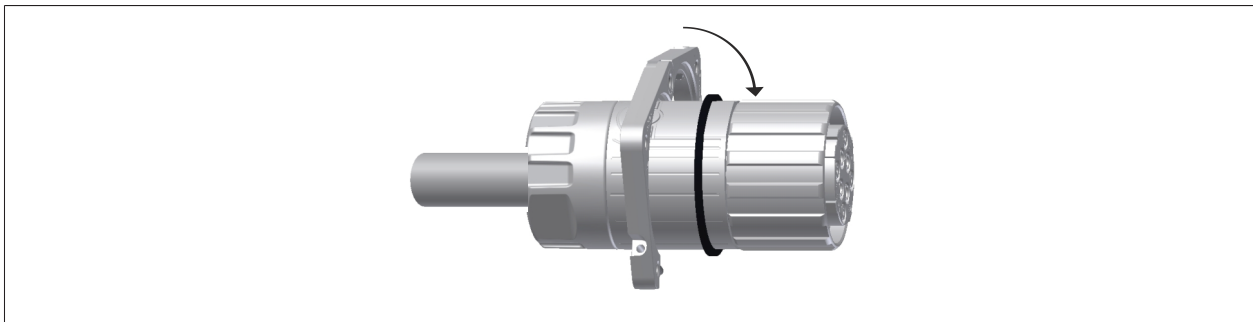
Attaching the metal flange to the connector (rear panel installation)
